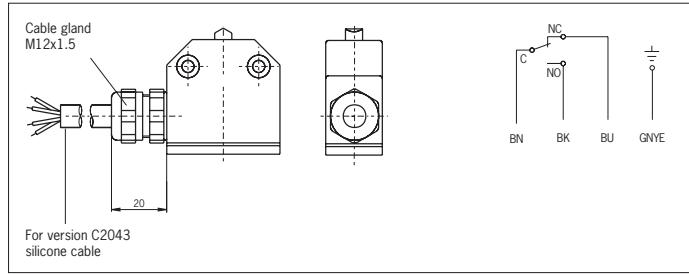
Dimension drawing/connection diagram for N01.550X... with connecting cable (PUR cable, 4x0.5 mm<sup>2</sup>)
